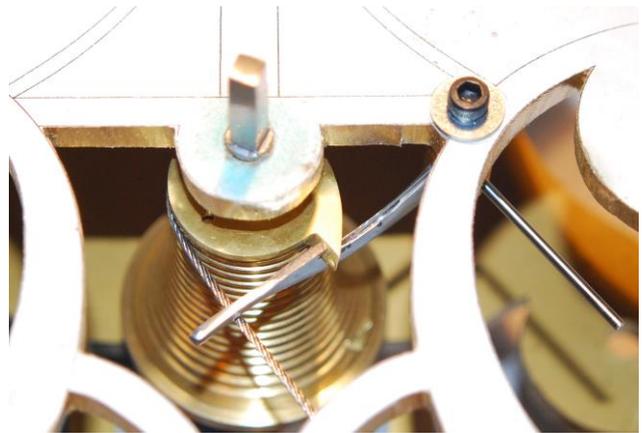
Determining the location of the fusee stop. A temporary pin and socket-head cap screw hold the stop works in place.
